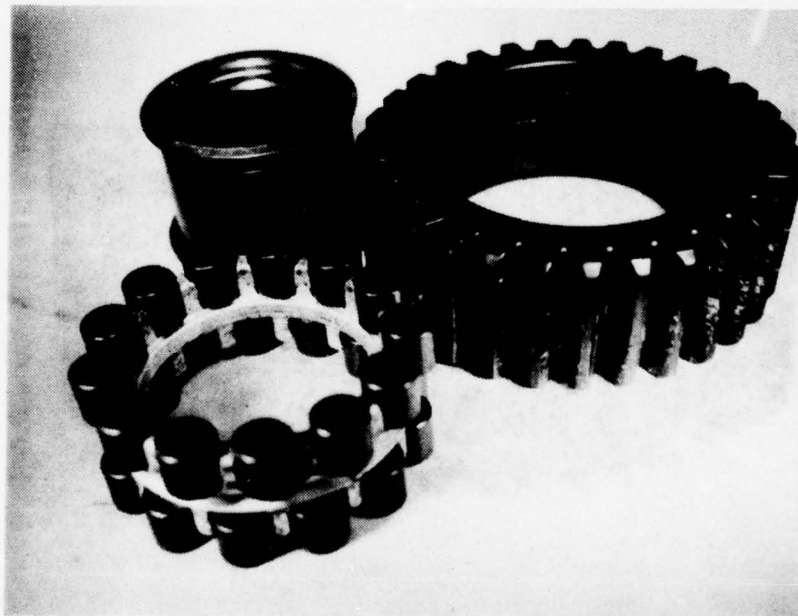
Upper planetary pinion, bearing inner race, rollers, roller guides, and retainer after 21-minute loss-of-lube retest of transmission number 1.
